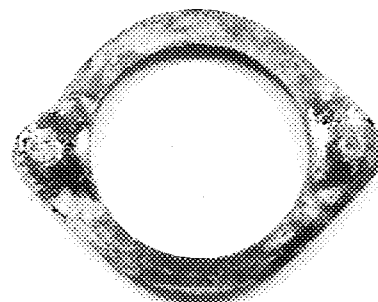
TOP MOUNT REINFORCEMENT - FRONT.
